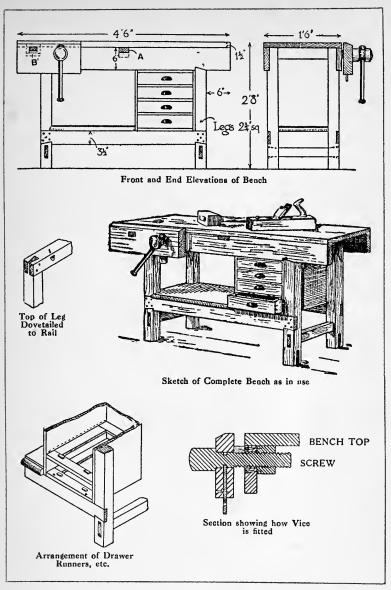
Sketch and Working Drawings of Bench with Shelf and Tool Drawers
